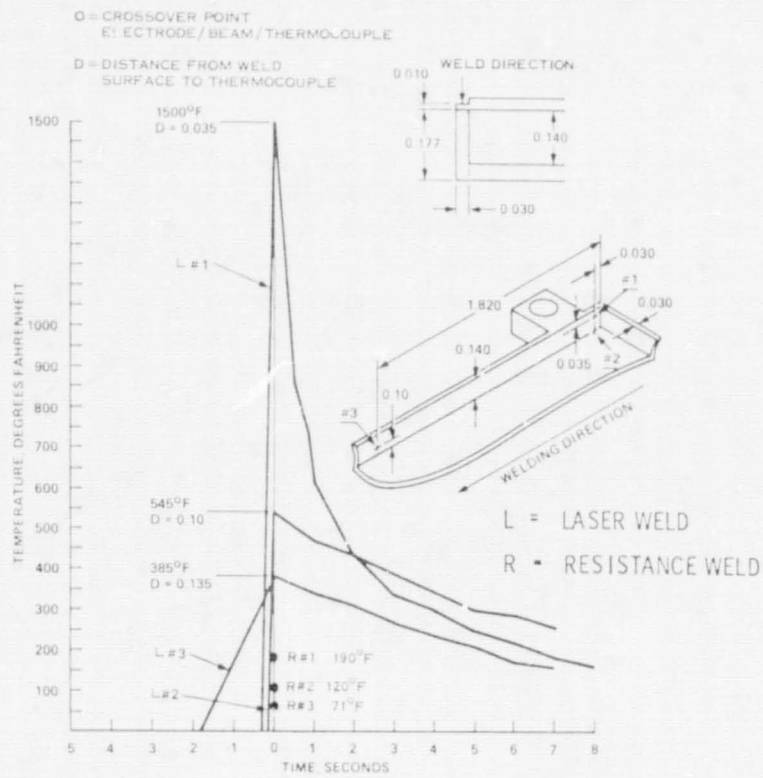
Temperature Measurements for Laser and Resistance Welds
